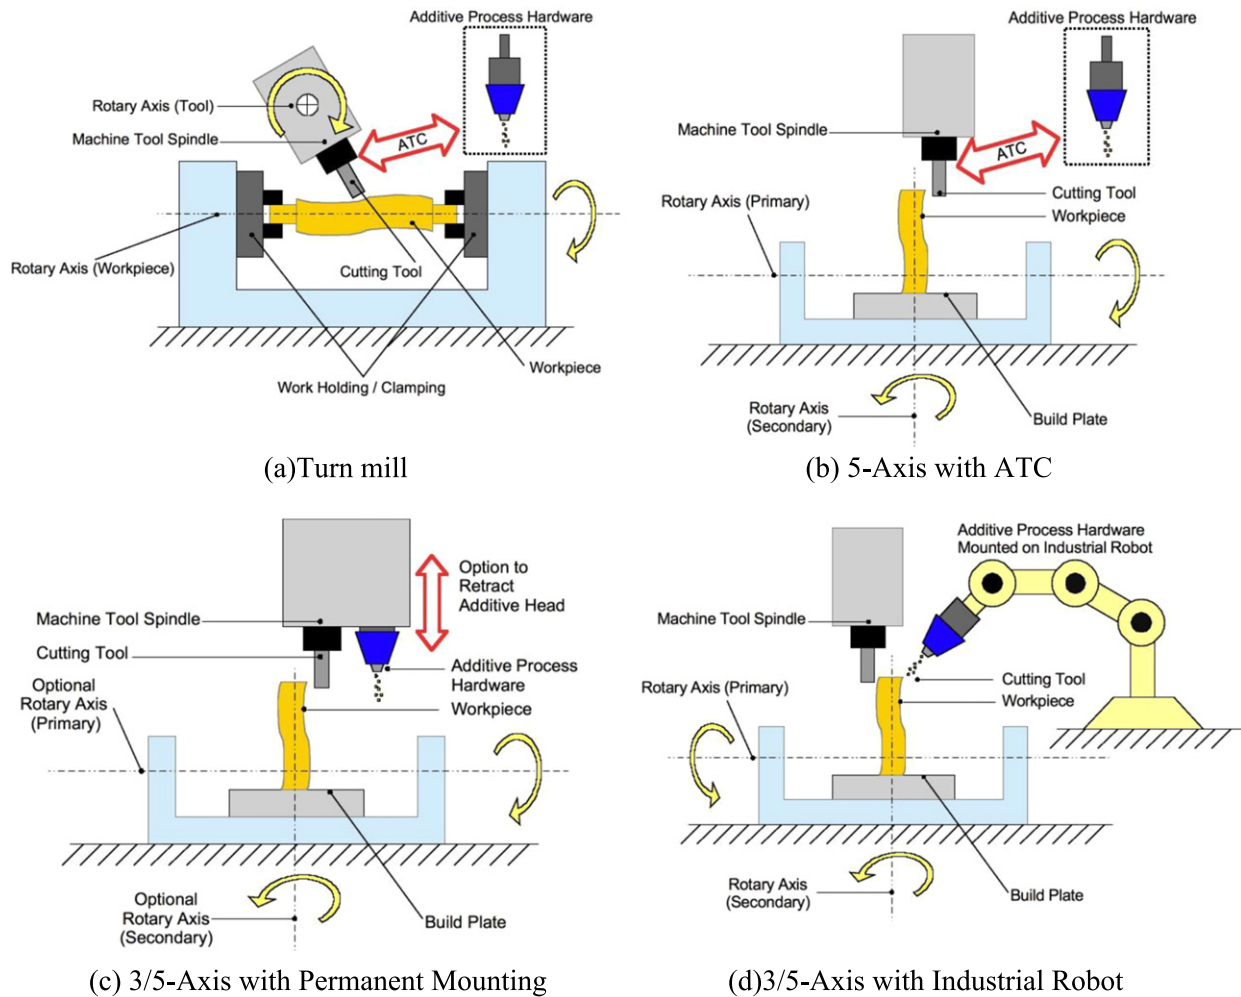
Machine tool configurations that are emerging as preferred methods of integration for CNC machining. Reproduced from Flynn, J.M., Shokrani, A., Newman, S.T., Dhokia, V., 2016. Hybrid additive and subtractive machine tools – Research and industrial developments. *International Journal of Machine Tools and Manufacture* 101, 79–101.
